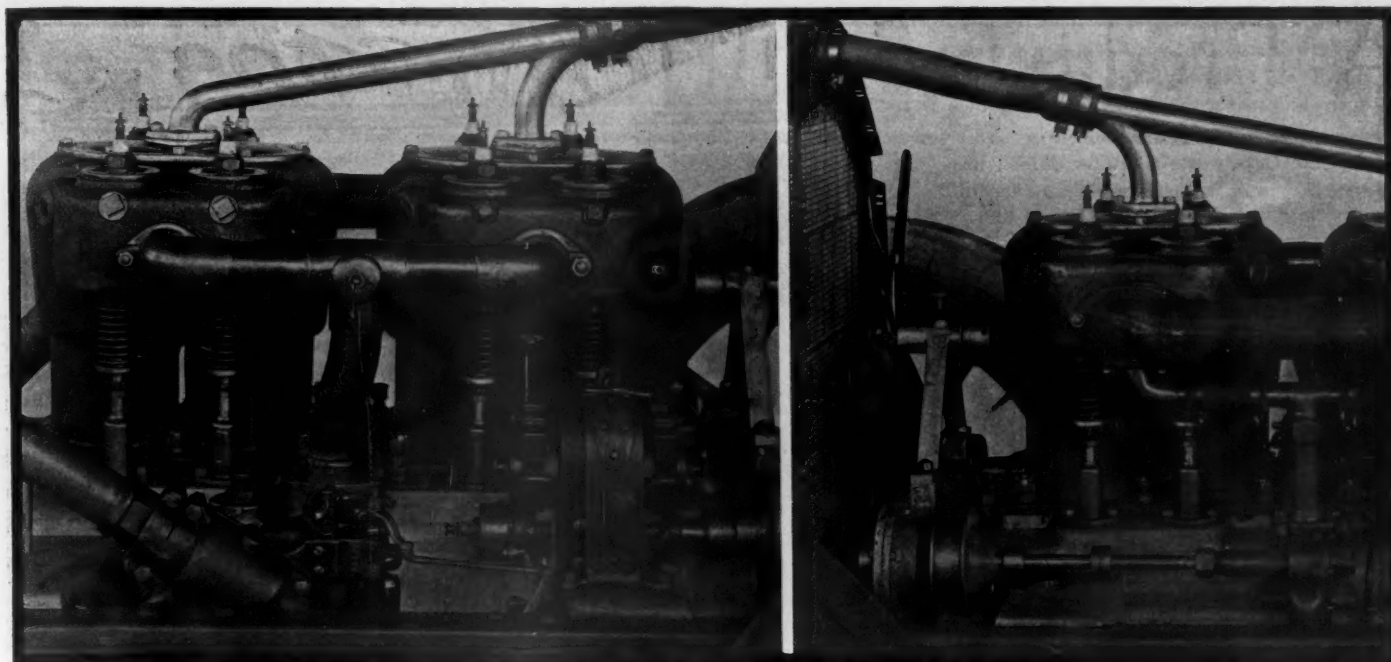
BOTH SIDES OF CONTINENTAL DESIGN OF ENGINE USED ON STUTZ CARS
